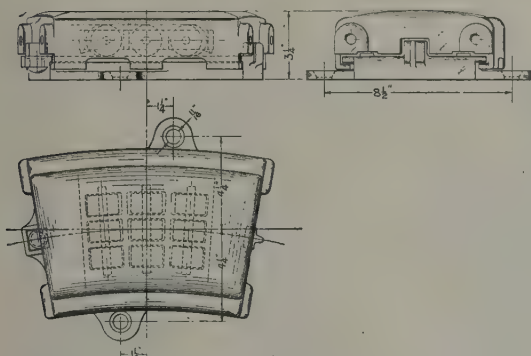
Creco Covered Roller Side Bearing for Freight Car Trucks.
